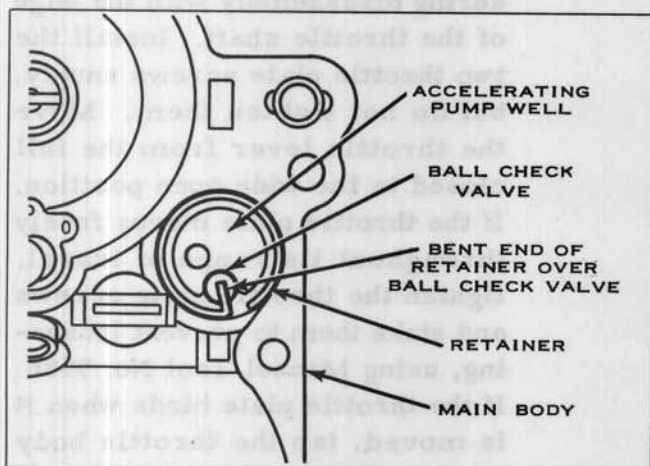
INSTALLATION BALL CHECK VALVE
